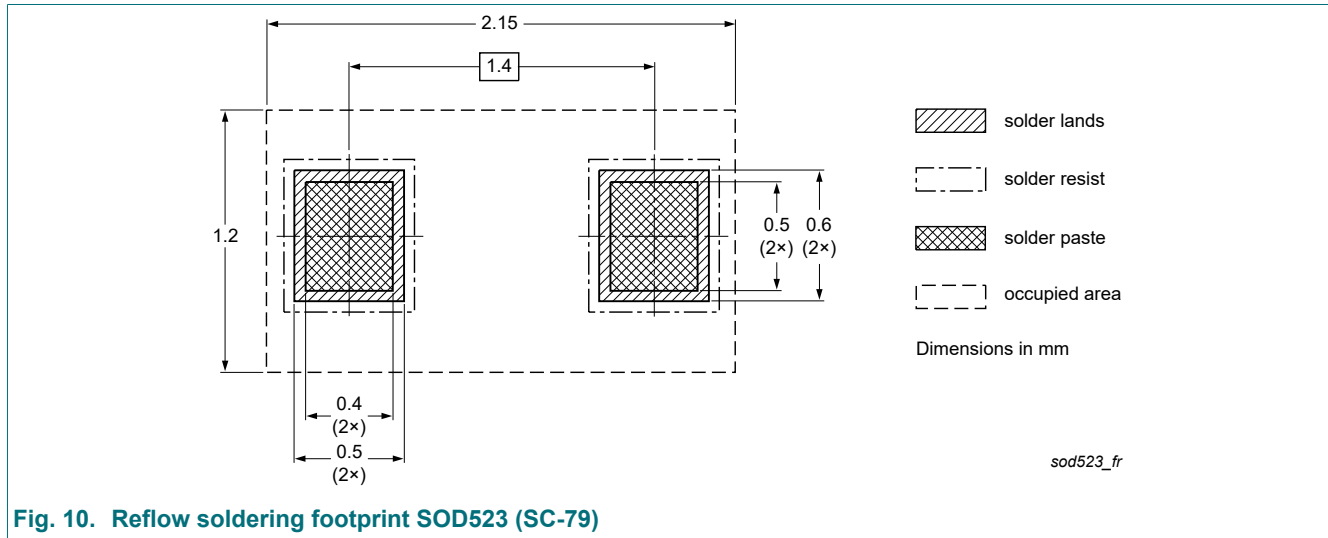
Reflow soldering footprint SOD523 (SC-79)
